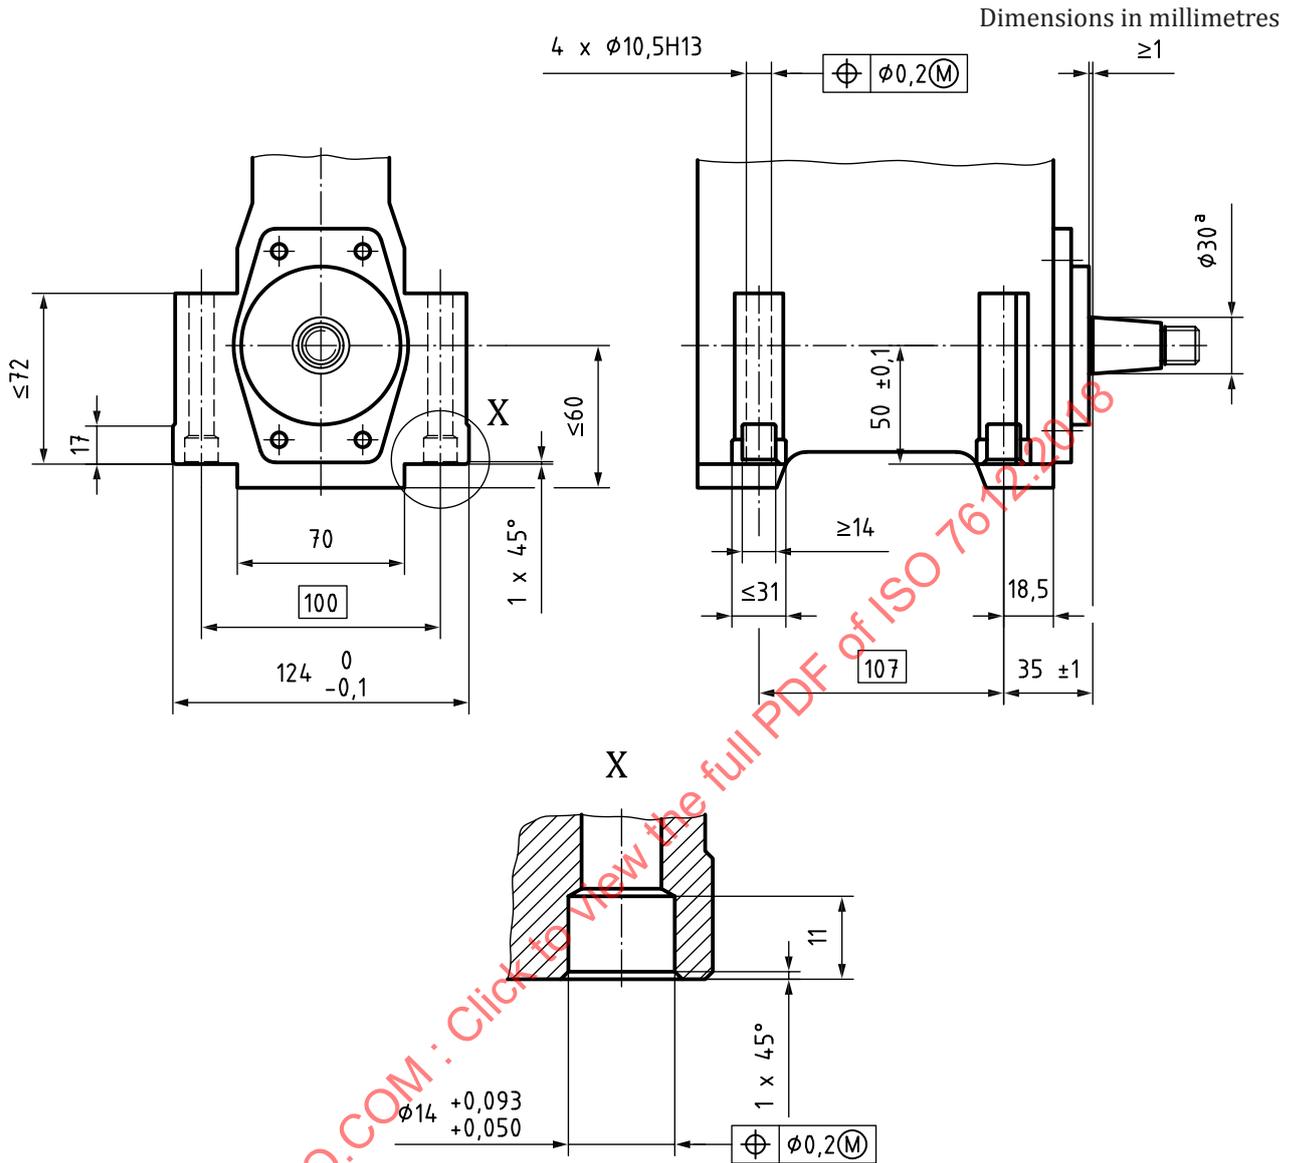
Base-mounted, two-cylinder, high-pressure supply pump — Type 6
